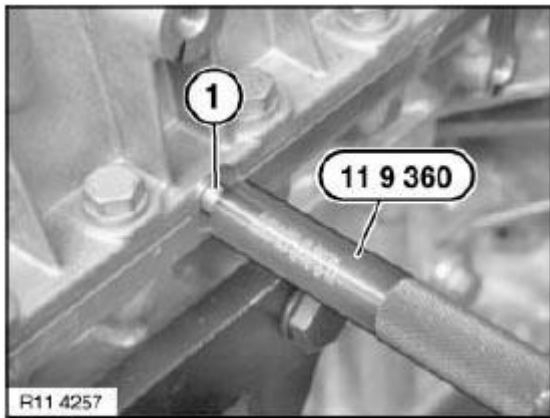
Installing Nozzles Using Special Tool 11 9 360
